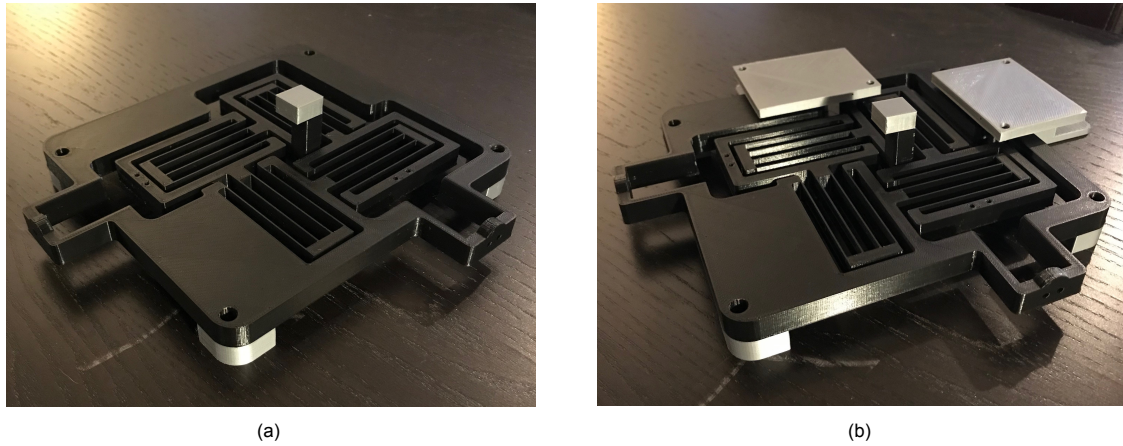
(a) The final 3D-printed demonstrator with the reference point shown in grey. (b) This figure also shows the sensor mounts that can be removed after calibration.
